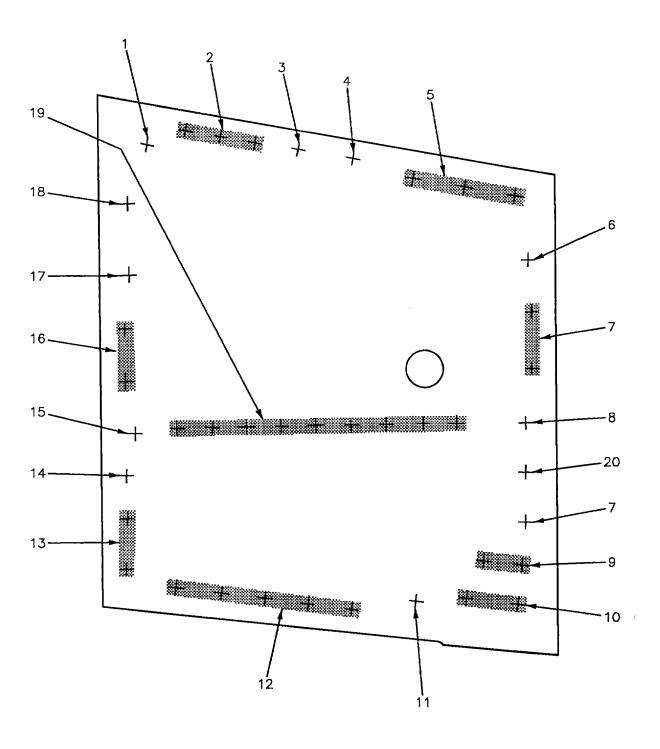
Skin (74A110954) Fasteners (Sheet 6)
